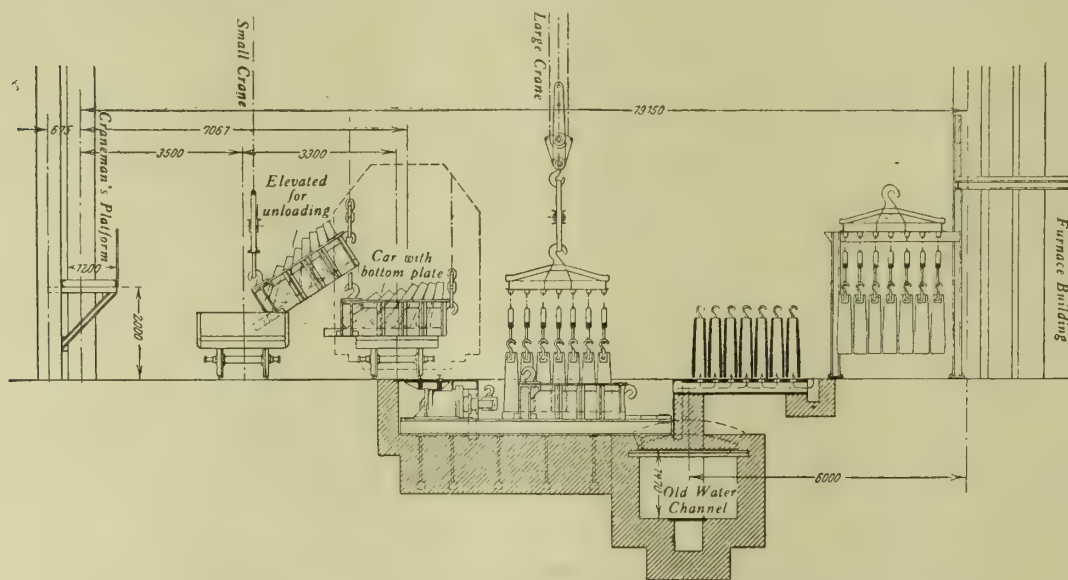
CROSS-SECTION OF CASTING PIT AT RESICZA, AUSTRIA-HUNGARY.
